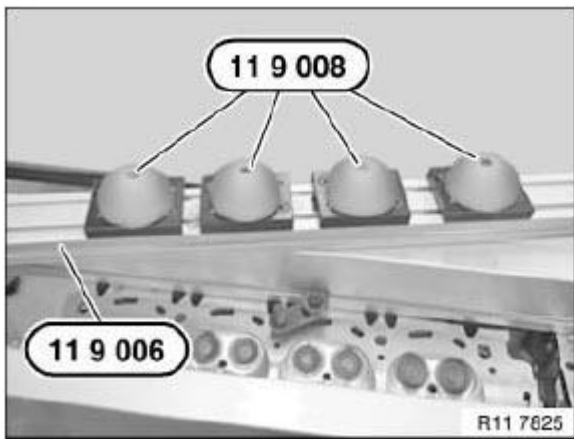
Identifying Special Tool (11 9 008 And 11 9 006)
